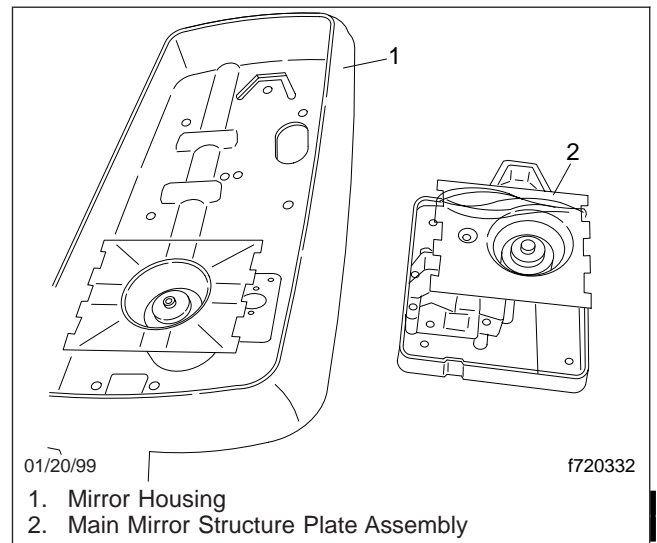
, Mirror Housing with Main Mirror Structure Plate Removed
